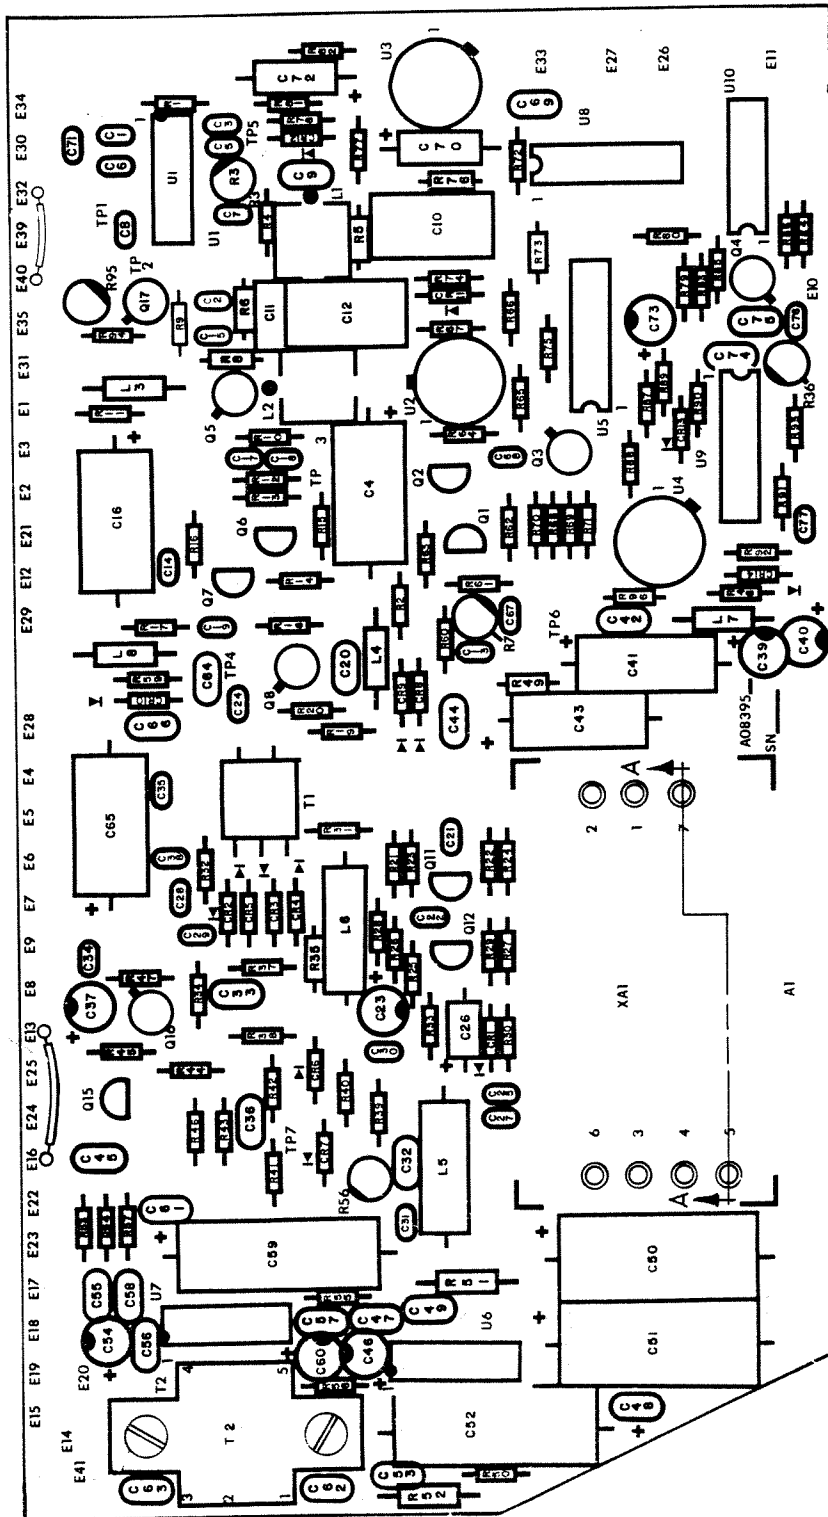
B. IF/AF A5, Circuit Card Assembly
